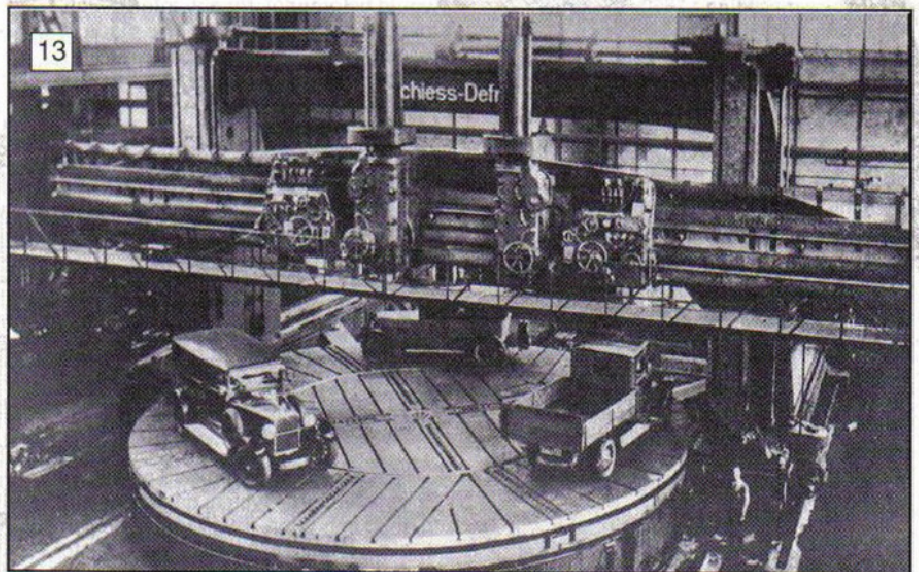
Large boring and turning mill, c.1930, Alfred Herbert.
